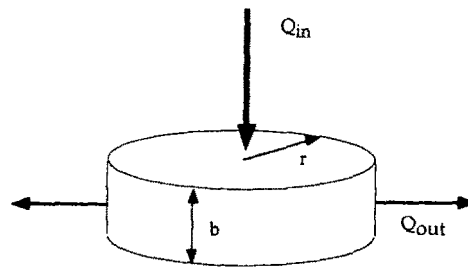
Heat transfer model for GTAW.  $Q_{in}$  is the welding torch input and  $Q_{out}$  is the conduction to the weldment from the periphery of the pool.
